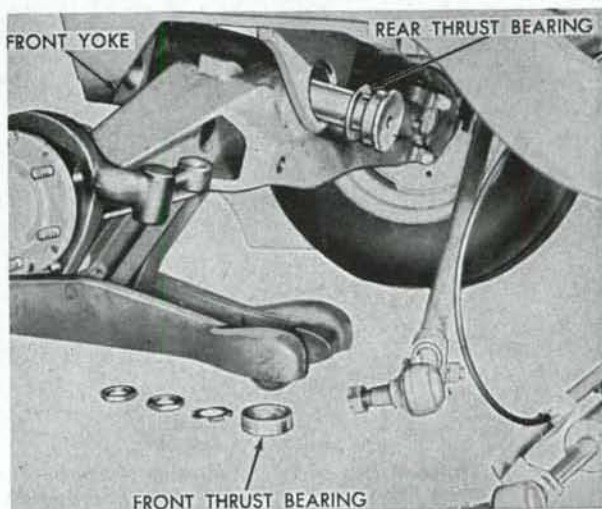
Spindle on Heavy Duty Industrial attaches to axle by means of spindle pin and tapered lock pin as shown. Install spindle thrust bearing with indentation up.
